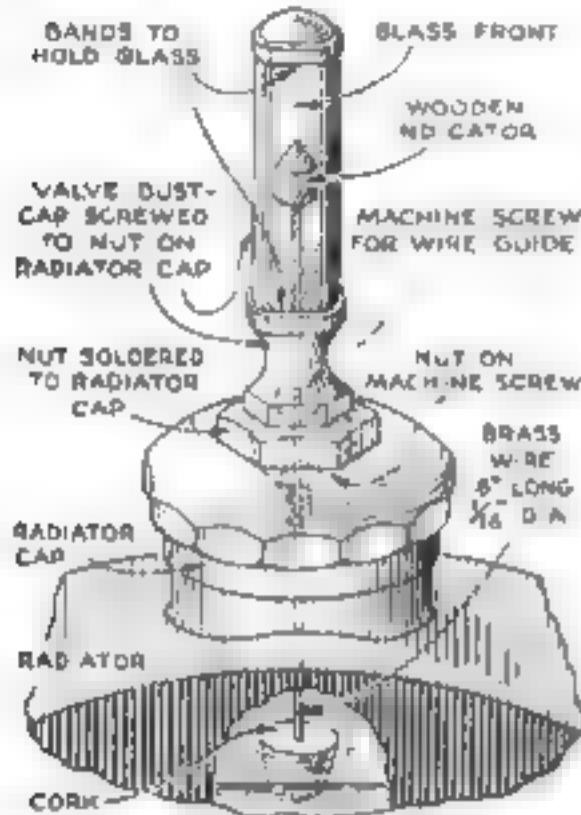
Indicators of old parts can be assembled to register water in radiator.
